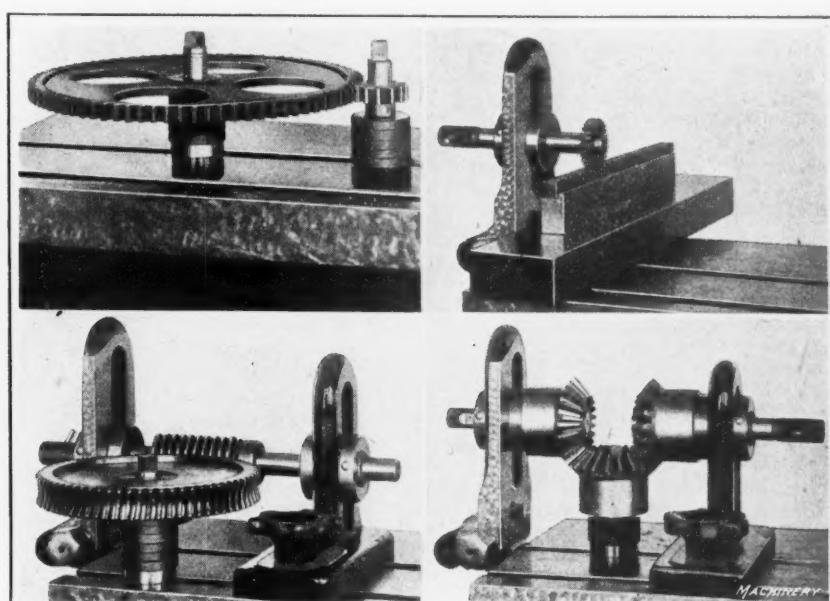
Some Classes of Work tested on the Eisler "Testall" Machine shown in Fig. 1
